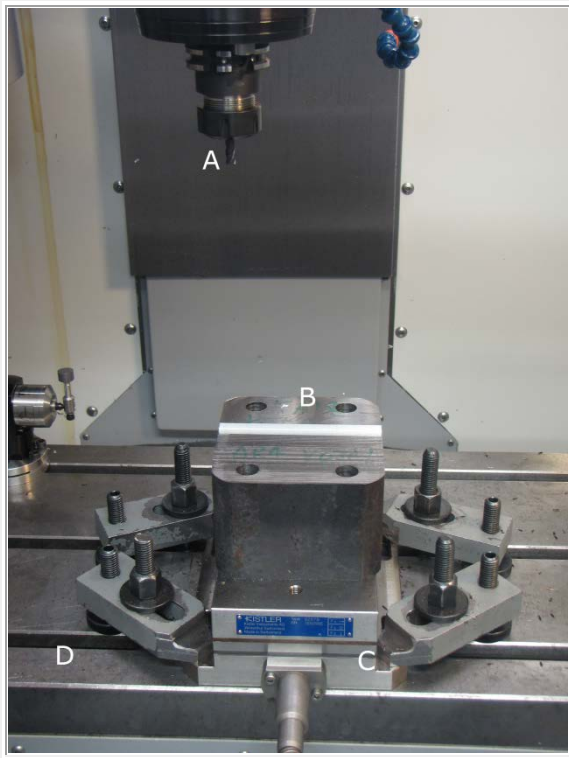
Setup for cutting force measurements: A) machine tool spindle with tested end mill; B) workpiece; C) dynamometer and D) table of machining centre.
